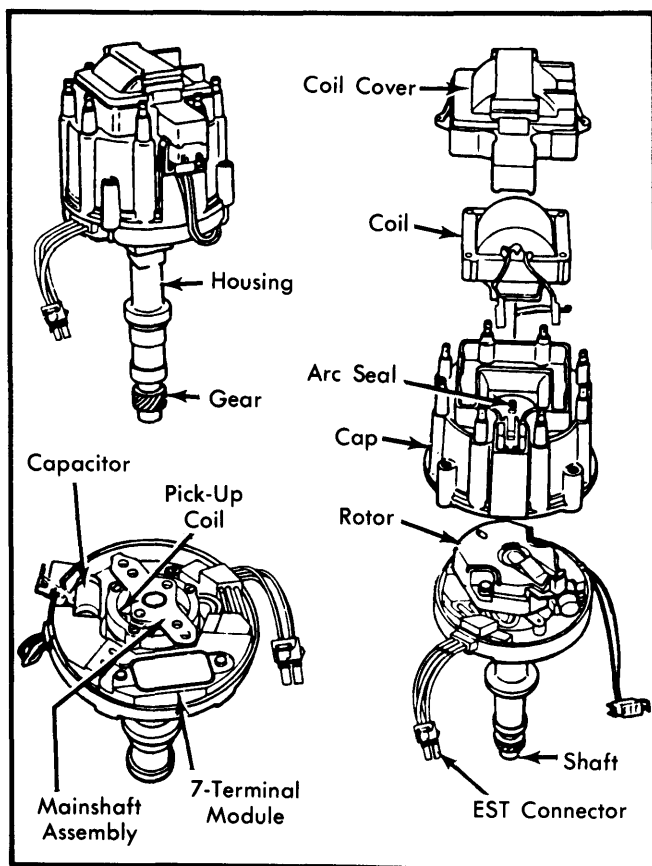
Disassembled View of EST Distributor (Model with Integral Coil Shown)
